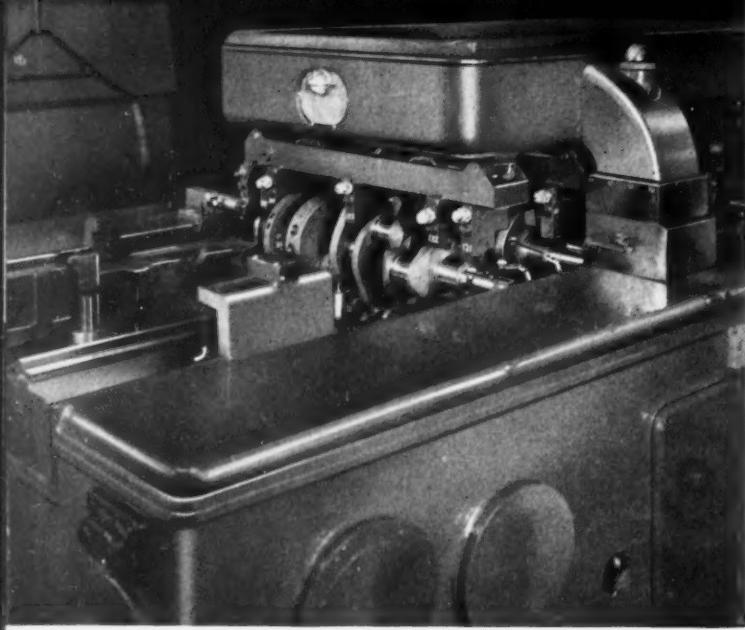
Discharging End of Machine, where an Electric Buzzer Operates and a Blue Light Flashes to Indicate a Rejected Crankshaft
